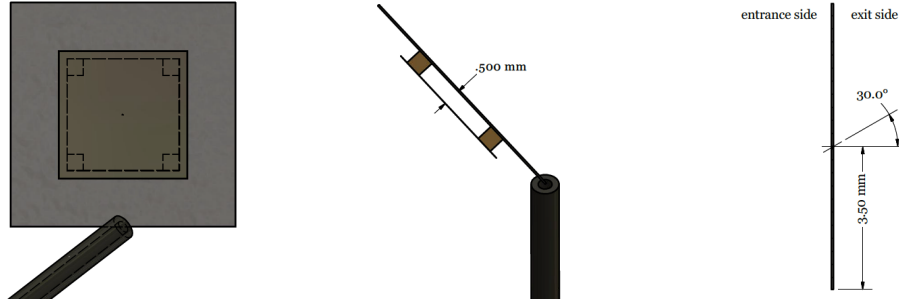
Backlighter mechanical design. CAD drawings from Sallee Klein. Left: top view of the backlighter target, showing the laser-irradiated surface of the Ni foil above the pinhole. Center: side-view of the complete backlighter target. Right: side-view of the pinhole substrate, showing the direction of tapered pinhole.
